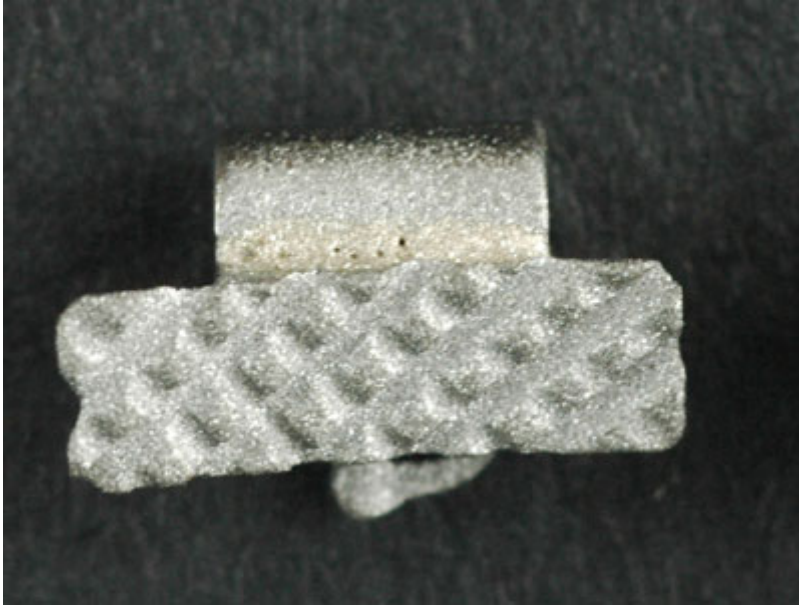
D Sand blasting the grooved surface using 50 μ Aluminium oxide particles for 15-20sec at distance of 3mm.
